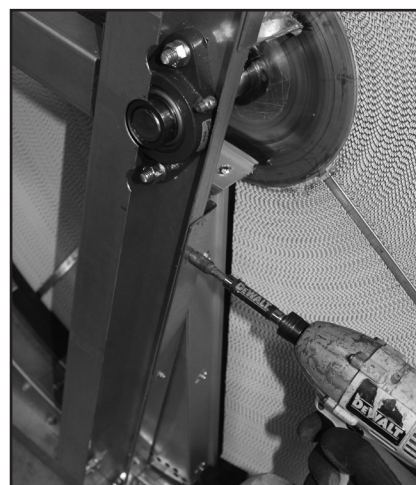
After removing the adjusting bolt(s), loosen the bottom pivot bolt.
